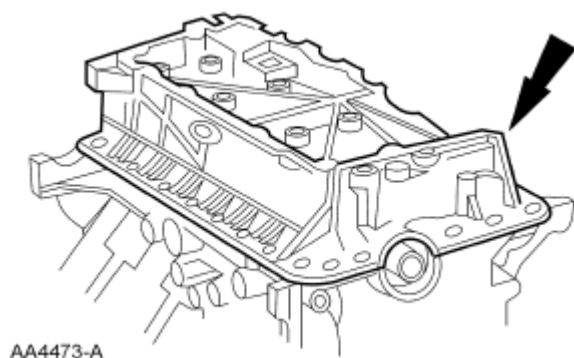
Identifying Cylinder Block Cradle And Gasket Assembly
